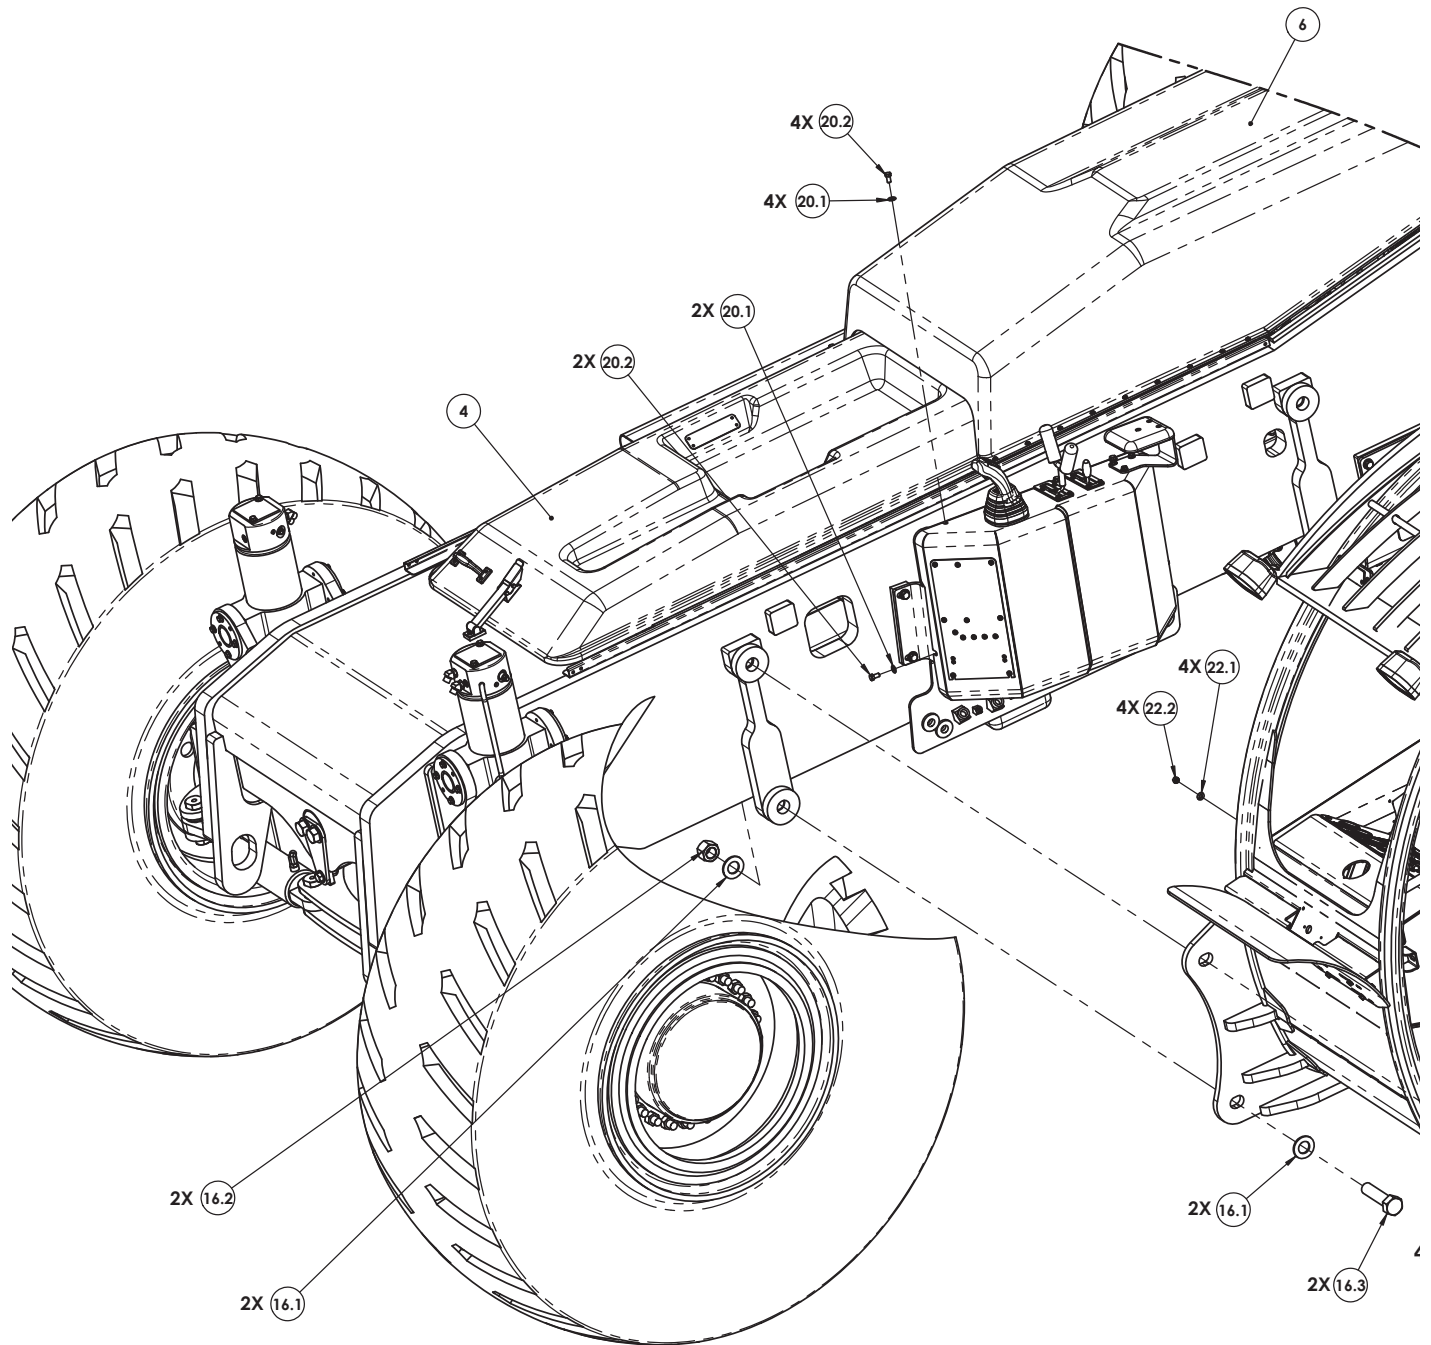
CHASSIS ASSEMBLY - CAB & COVERS (32002-000)
